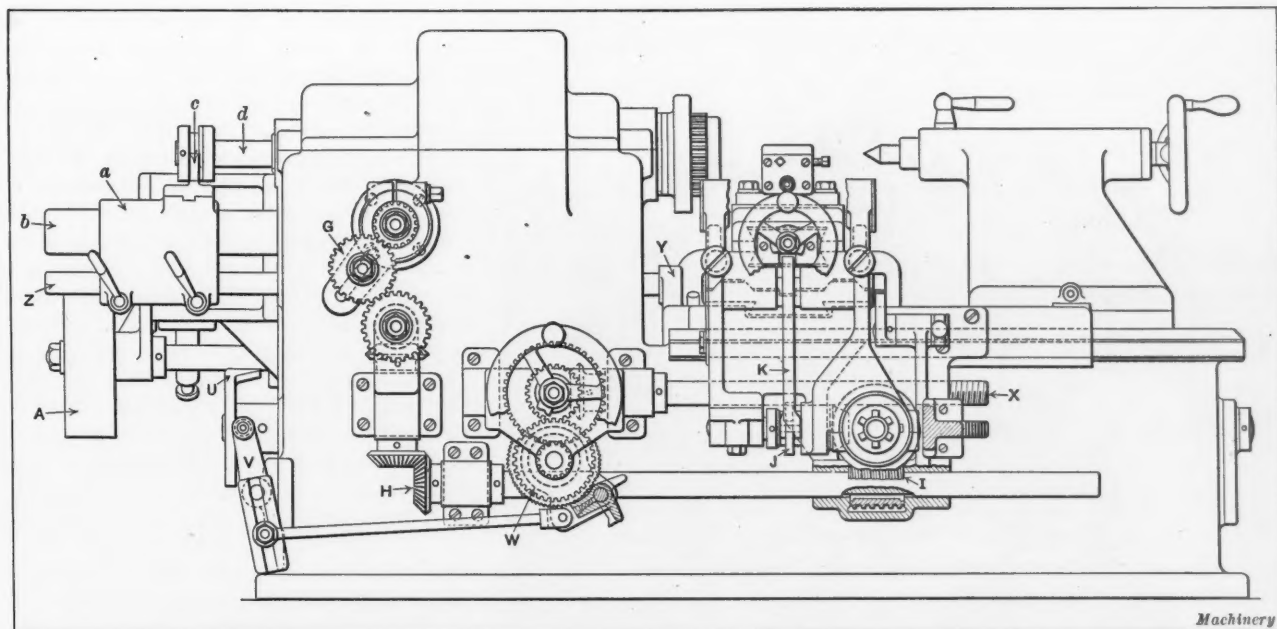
Mechanism for transmitting Power to Oscillating Relieving Slide, feeding Relieving Tool, and adjusting Position of Milling Cutter
